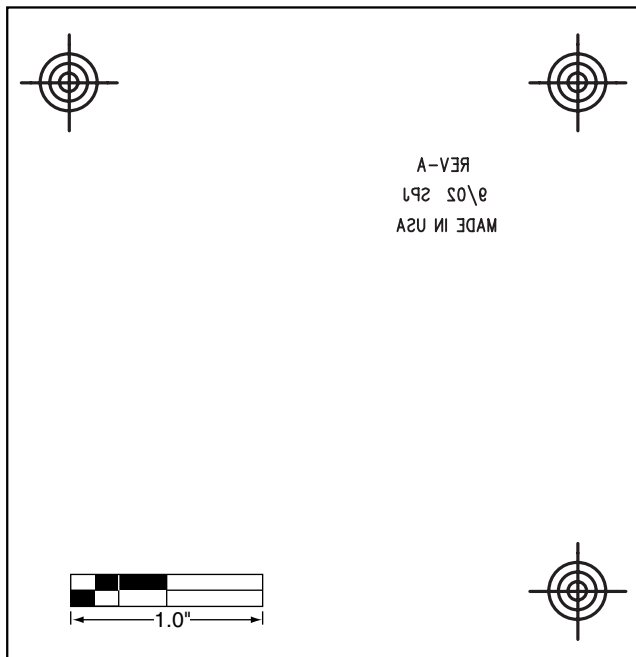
MAX9989/MAX9990 EV Kit PC Board Layout—
